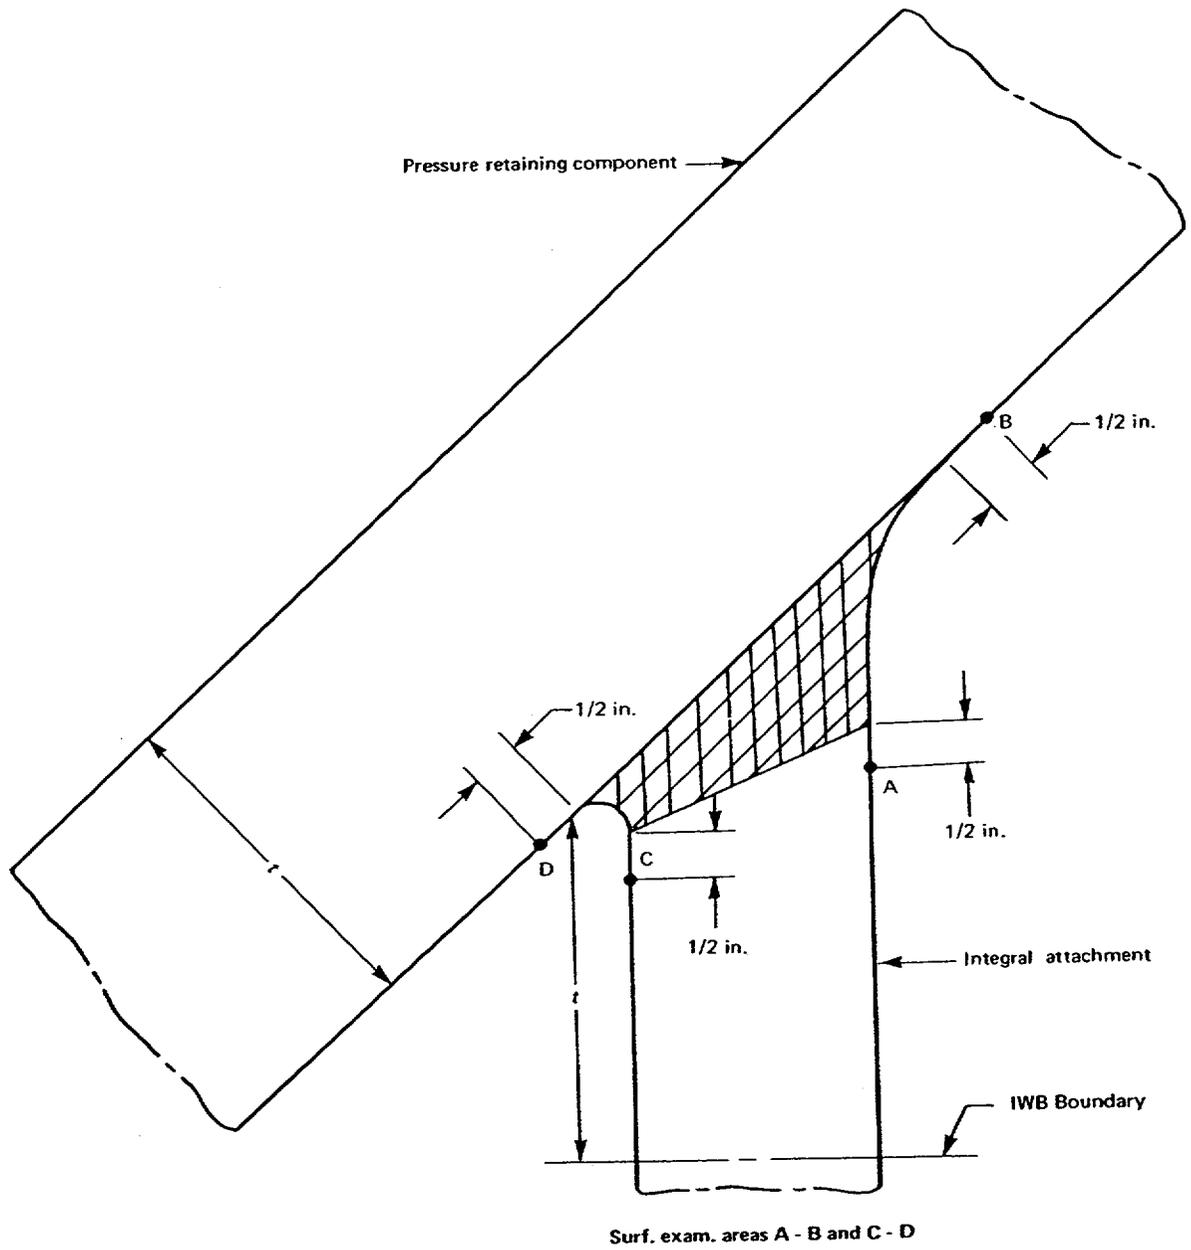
INTEGRAL ATTACHMENT WELD
